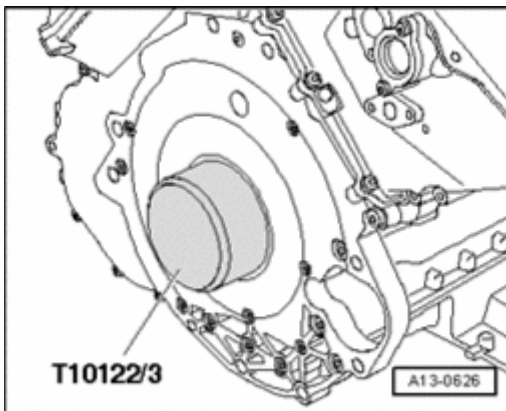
Pressing Seal Evenly All Around Until It Reaches Stop Using T10122/3
